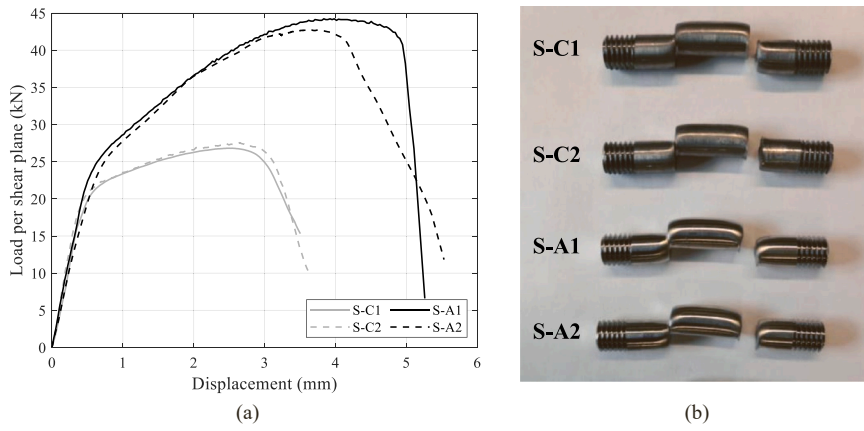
(a) Load-slip results of double shear tests; (b) Photograph of fractured specimens.
